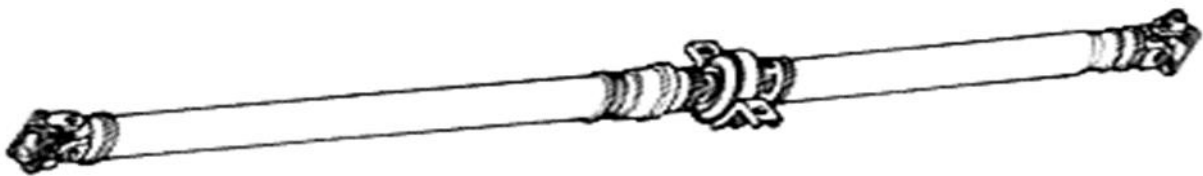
Two-piece drive-line with single intermediate support bearing [43].
